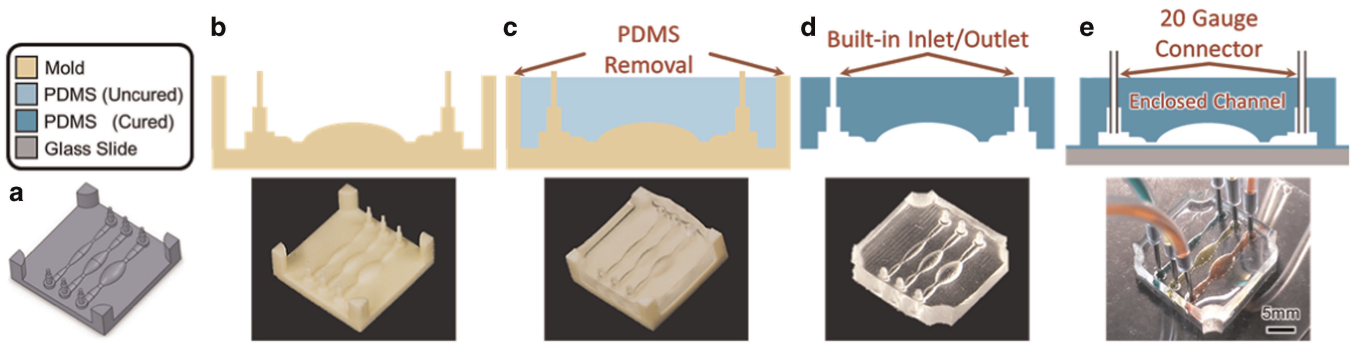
Illustration of the 3D printed transfer molding technique and process for single-sided device. *Top:* conceptual images. *Bottom:* Photographic images. (a) Mold is designed in CAD program such as SolidWorks™ (b) Mold is 3D Printed from CAD model, treated, and covered with PDMS which is then cured. (c) Excess PDMS is cut away using a scalpel and the edges of the mold as a guide. (d) Cured PDMS is removed from the mold using the guide-posts to assist manual removal. The PDMS device has integrated inlets and outlets, and is (e) bonded to glass to create enclosed, arbitrary channels. Stainless steel fluidic connectors can be directly inserted to the system via the integrated fluid inlets. The PDMS structure can be bonded onto a glass substrate to make the enclosed channels and reservoirs system.
